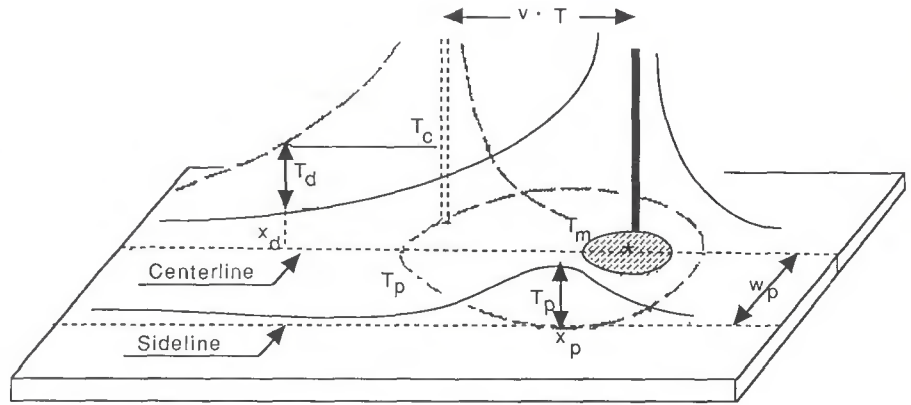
Definitions of the welding outputs T_p and T_d .
